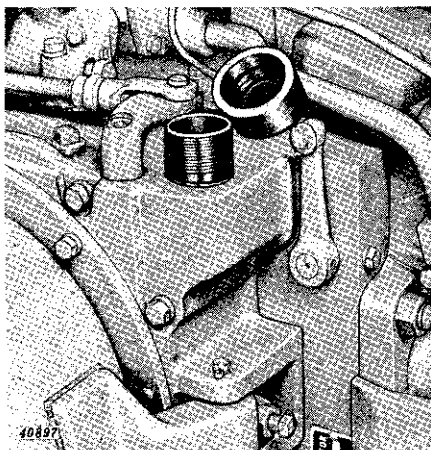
Diesel Engine Crankcase Filler Opening
